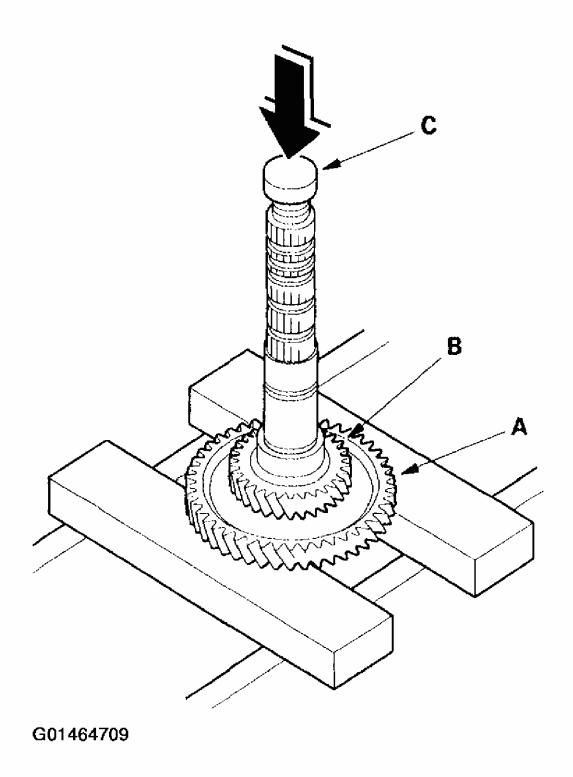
Removing The 1st Gear & 4th Gear From The Countershaft Courtesy of AMERICAN HONDA MOTOR CO., INC.
